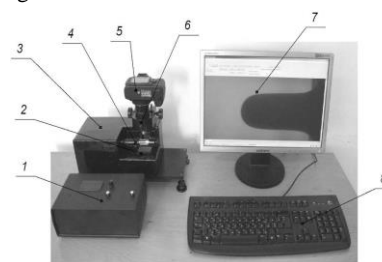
The external view of device VMN-2: 1 – electronic unit; 2 – lighting unit; 3 – mechanical unit; 4 – patron; 5 – camera; 6 – focusing unit; 7 – PC monitor; 8 – keyboard
